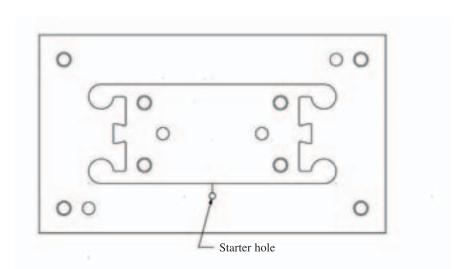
6 Placement of Starter Hole If the remaining blank is the desired shape, place the starter hole in blank section of the die.
